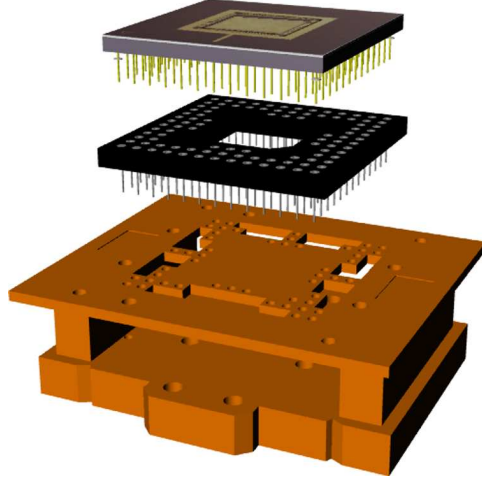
Detail of the CPGA mounting socket, with a copper support. The socket is soldered into the support to ensure good thermal contact.
